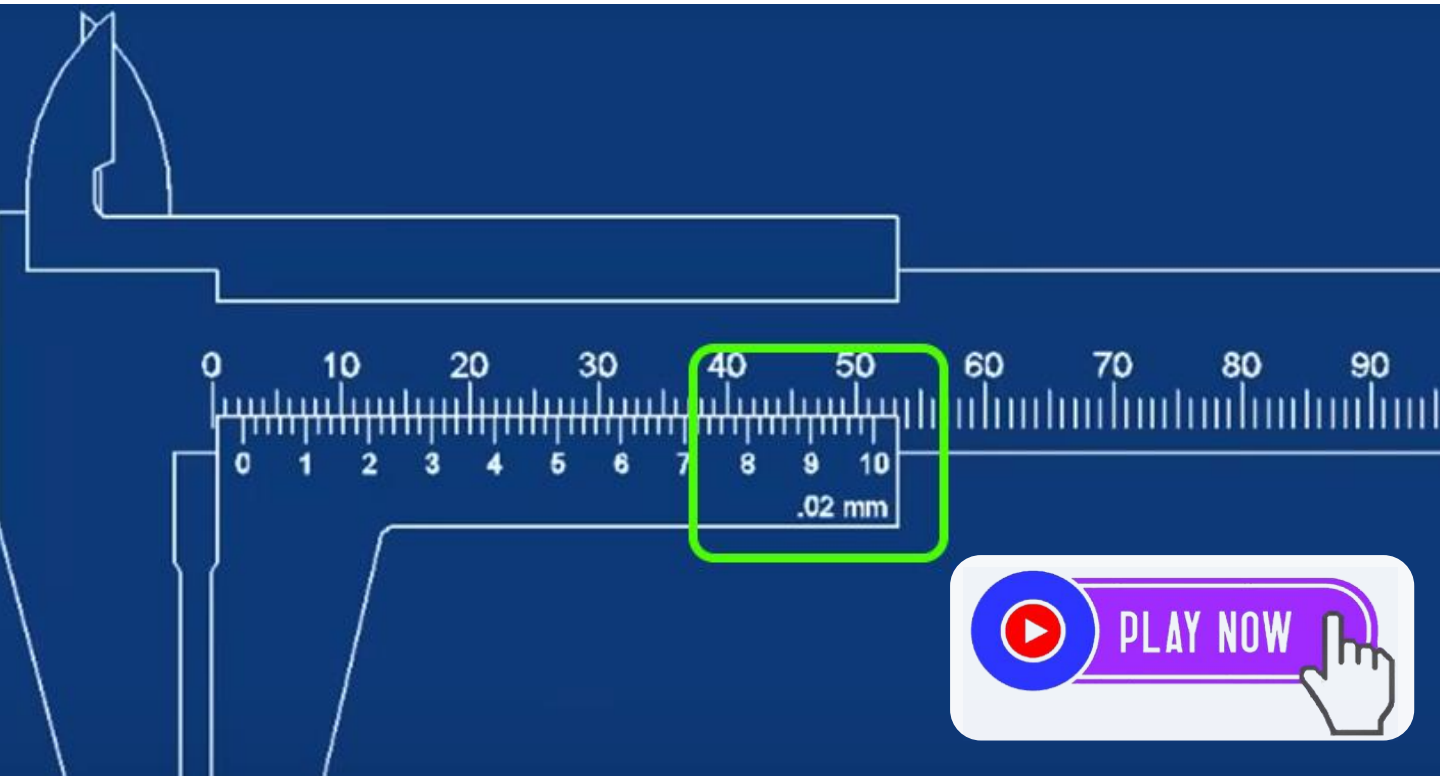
How to use Vernier caliper (0.02mm). [37]
